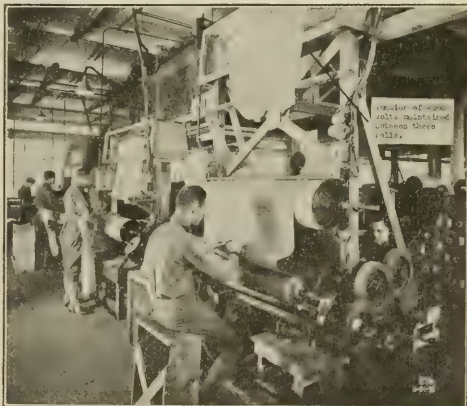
HIGH TENSION ELECTRICAL TESTING MACHINES FOR FACE FABRICS TO DETERMINE PINHOLES OR FLAWS
